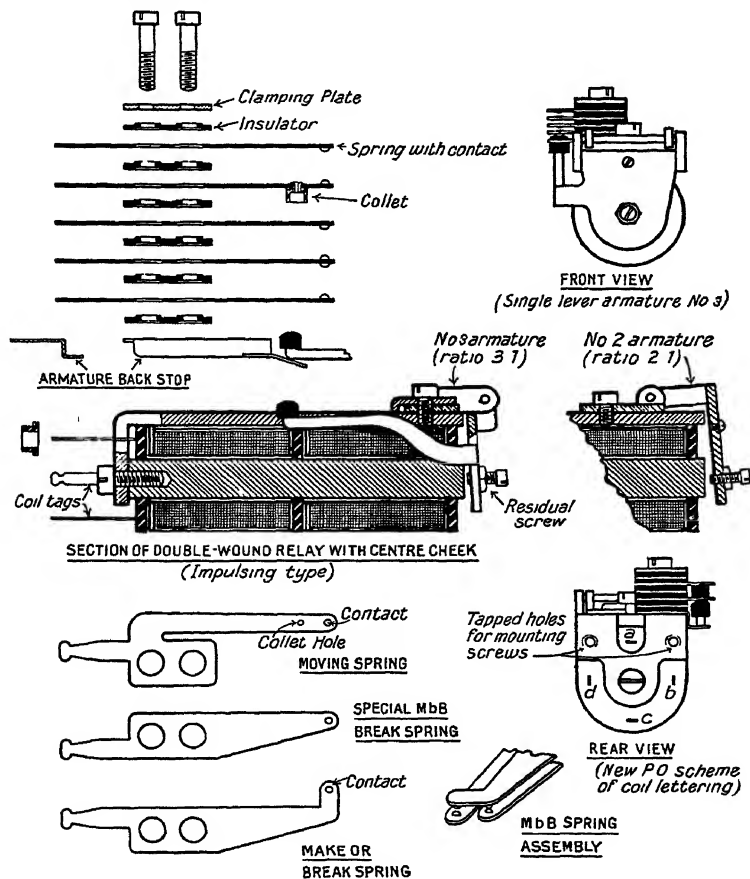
A.T.M. AUTO-TYPE RELAY ASSEMBLY
